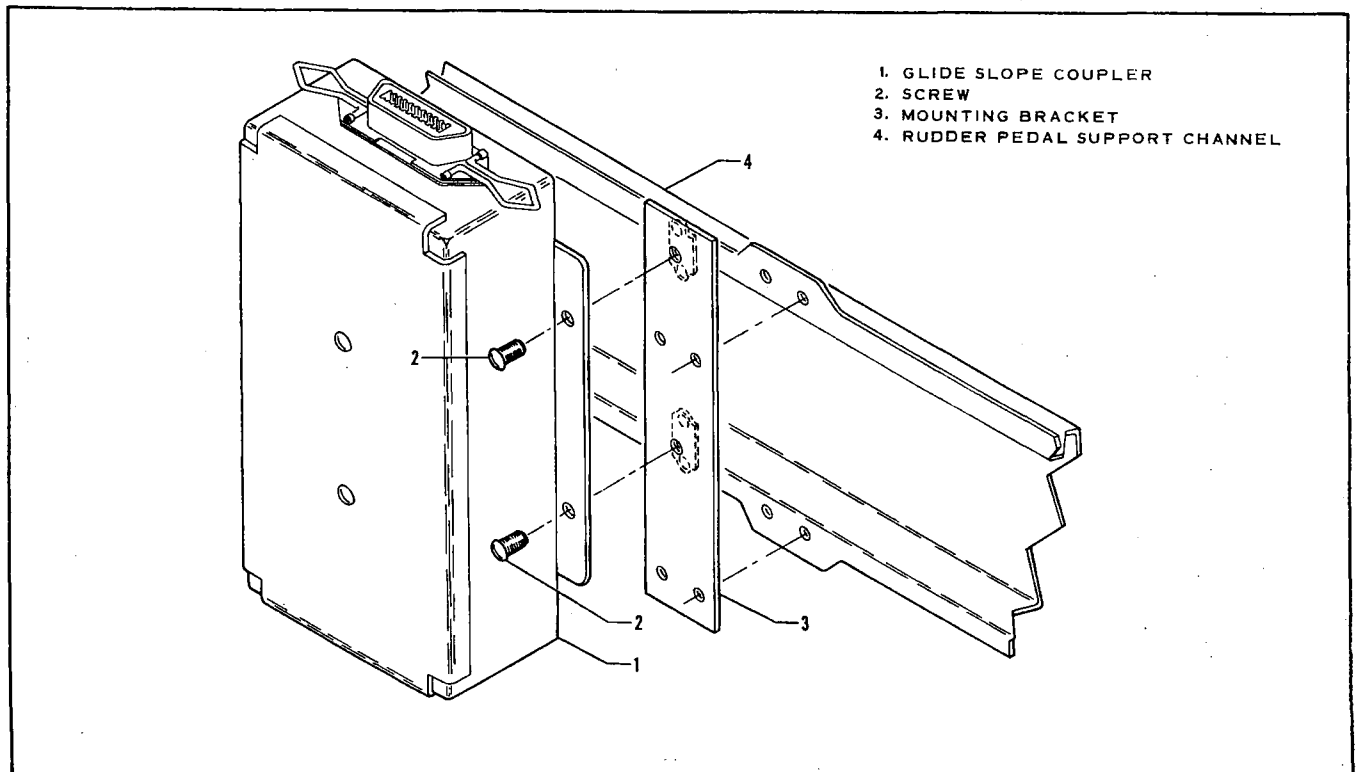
Glide Slope Coupler Installation, PA-31 and PA-31-350
